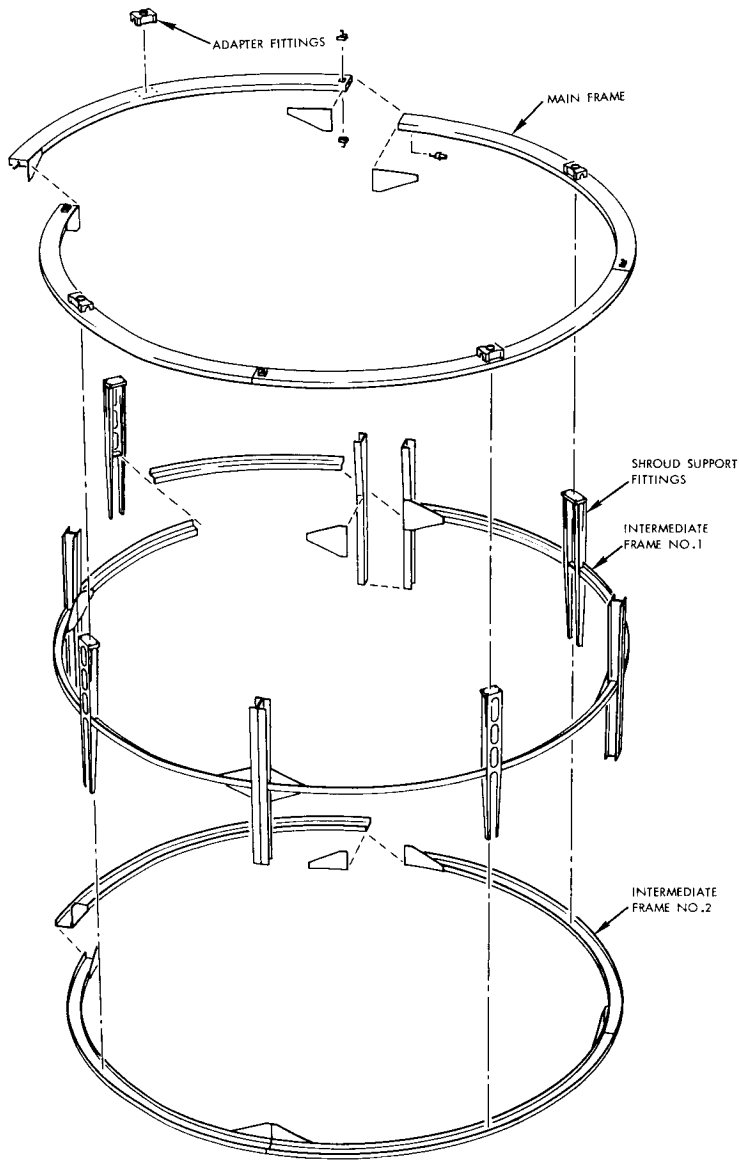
Planetary Vehicle Adapter, Exploded Detail View
